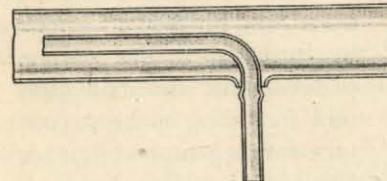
A SMALL TUBE THREADED THROUGH THE SIDE OF A LARGER ONE READY TO SEAL.
